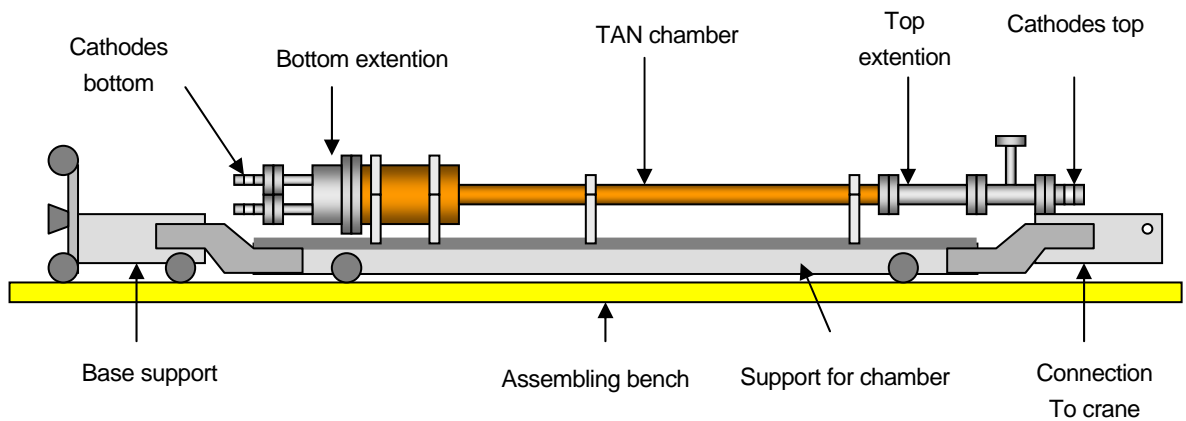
Sketch of the NEG Coating Lifting Assembly for the support of the Chambers
